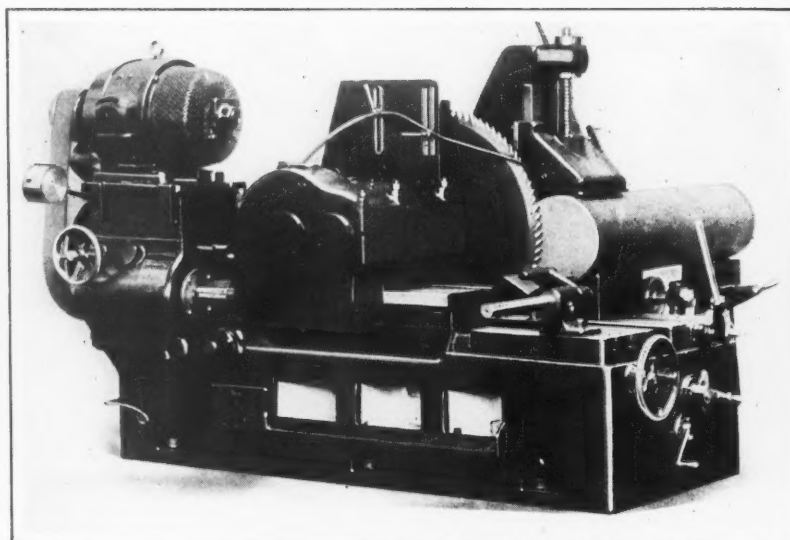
Heller Cold Metal Saw Placed on the Market by the Steinle Turret Machine Co.
